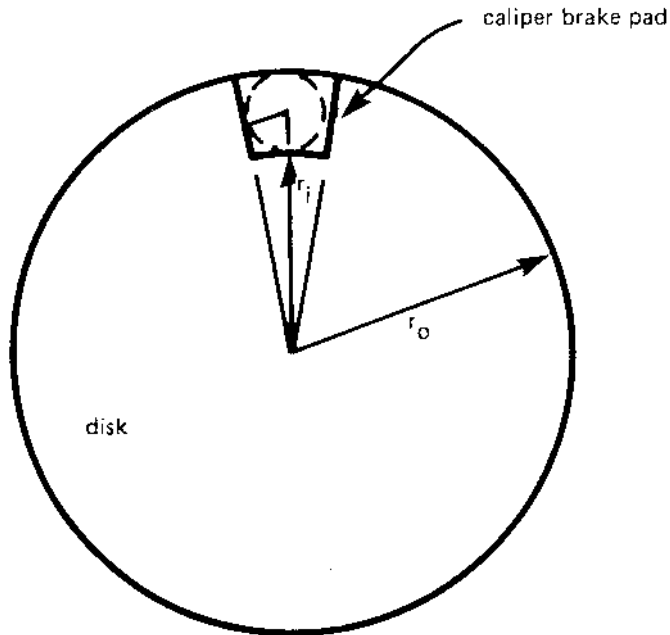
Caliper brake lining that is a sector of an annular ring.
